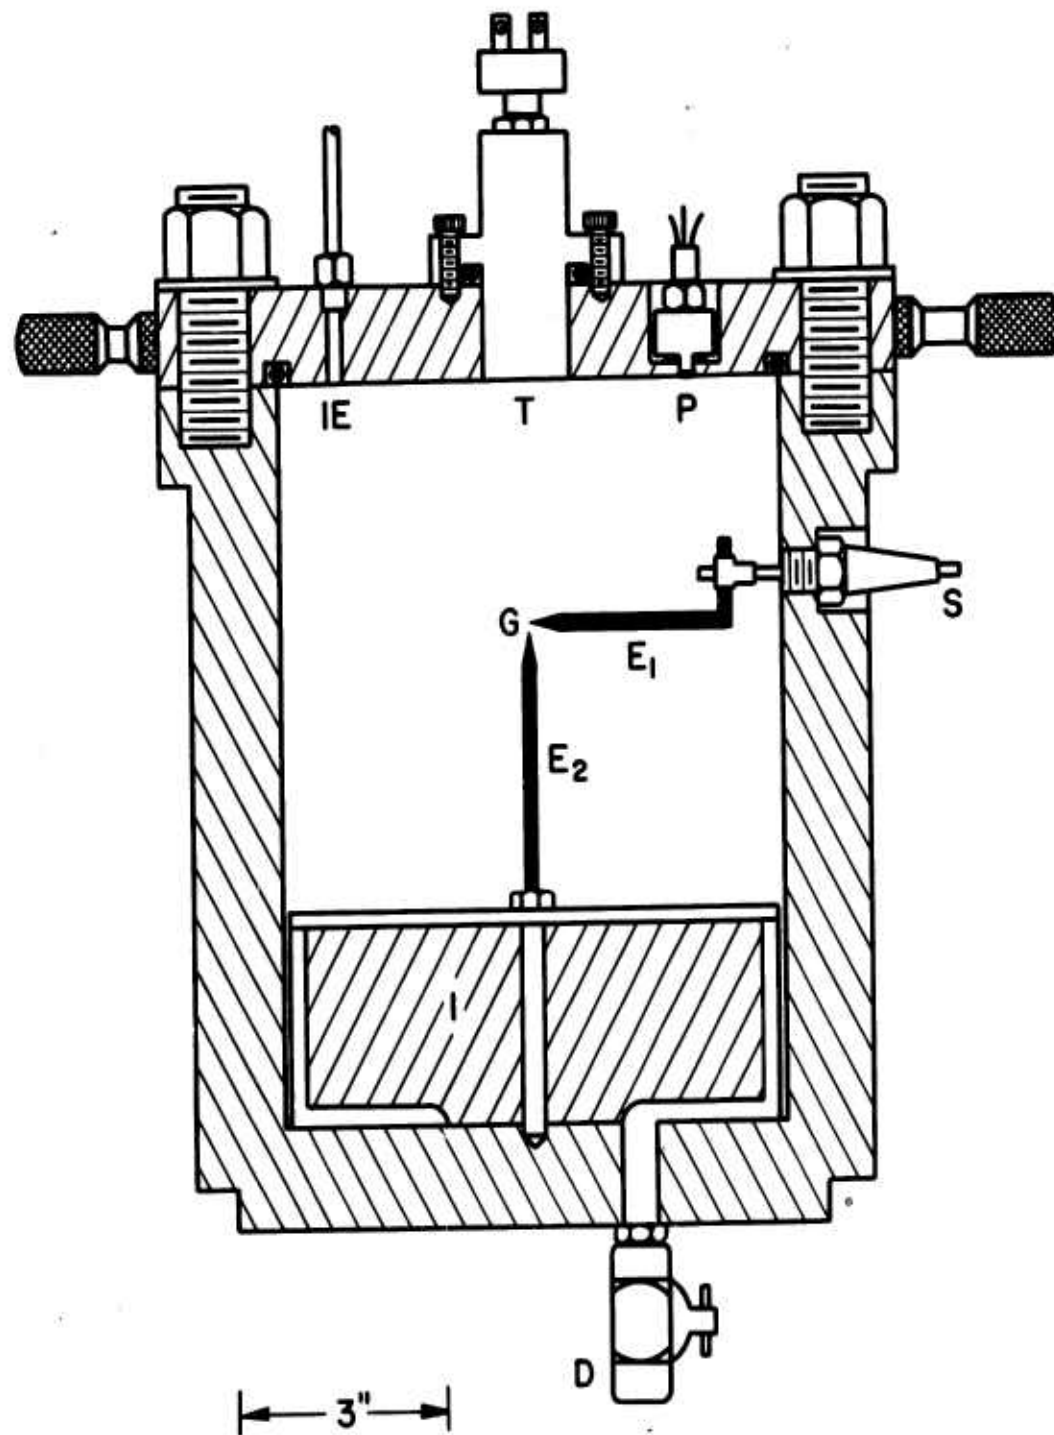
SCALE DRAWING OF CYLINDRICAL EXPLOSION VESSEL
